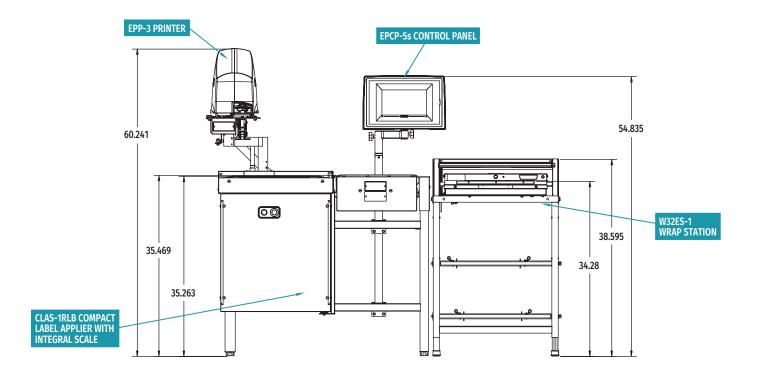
DETAILS AND DIMENSIONS (COMPLETE SYSTEM)
